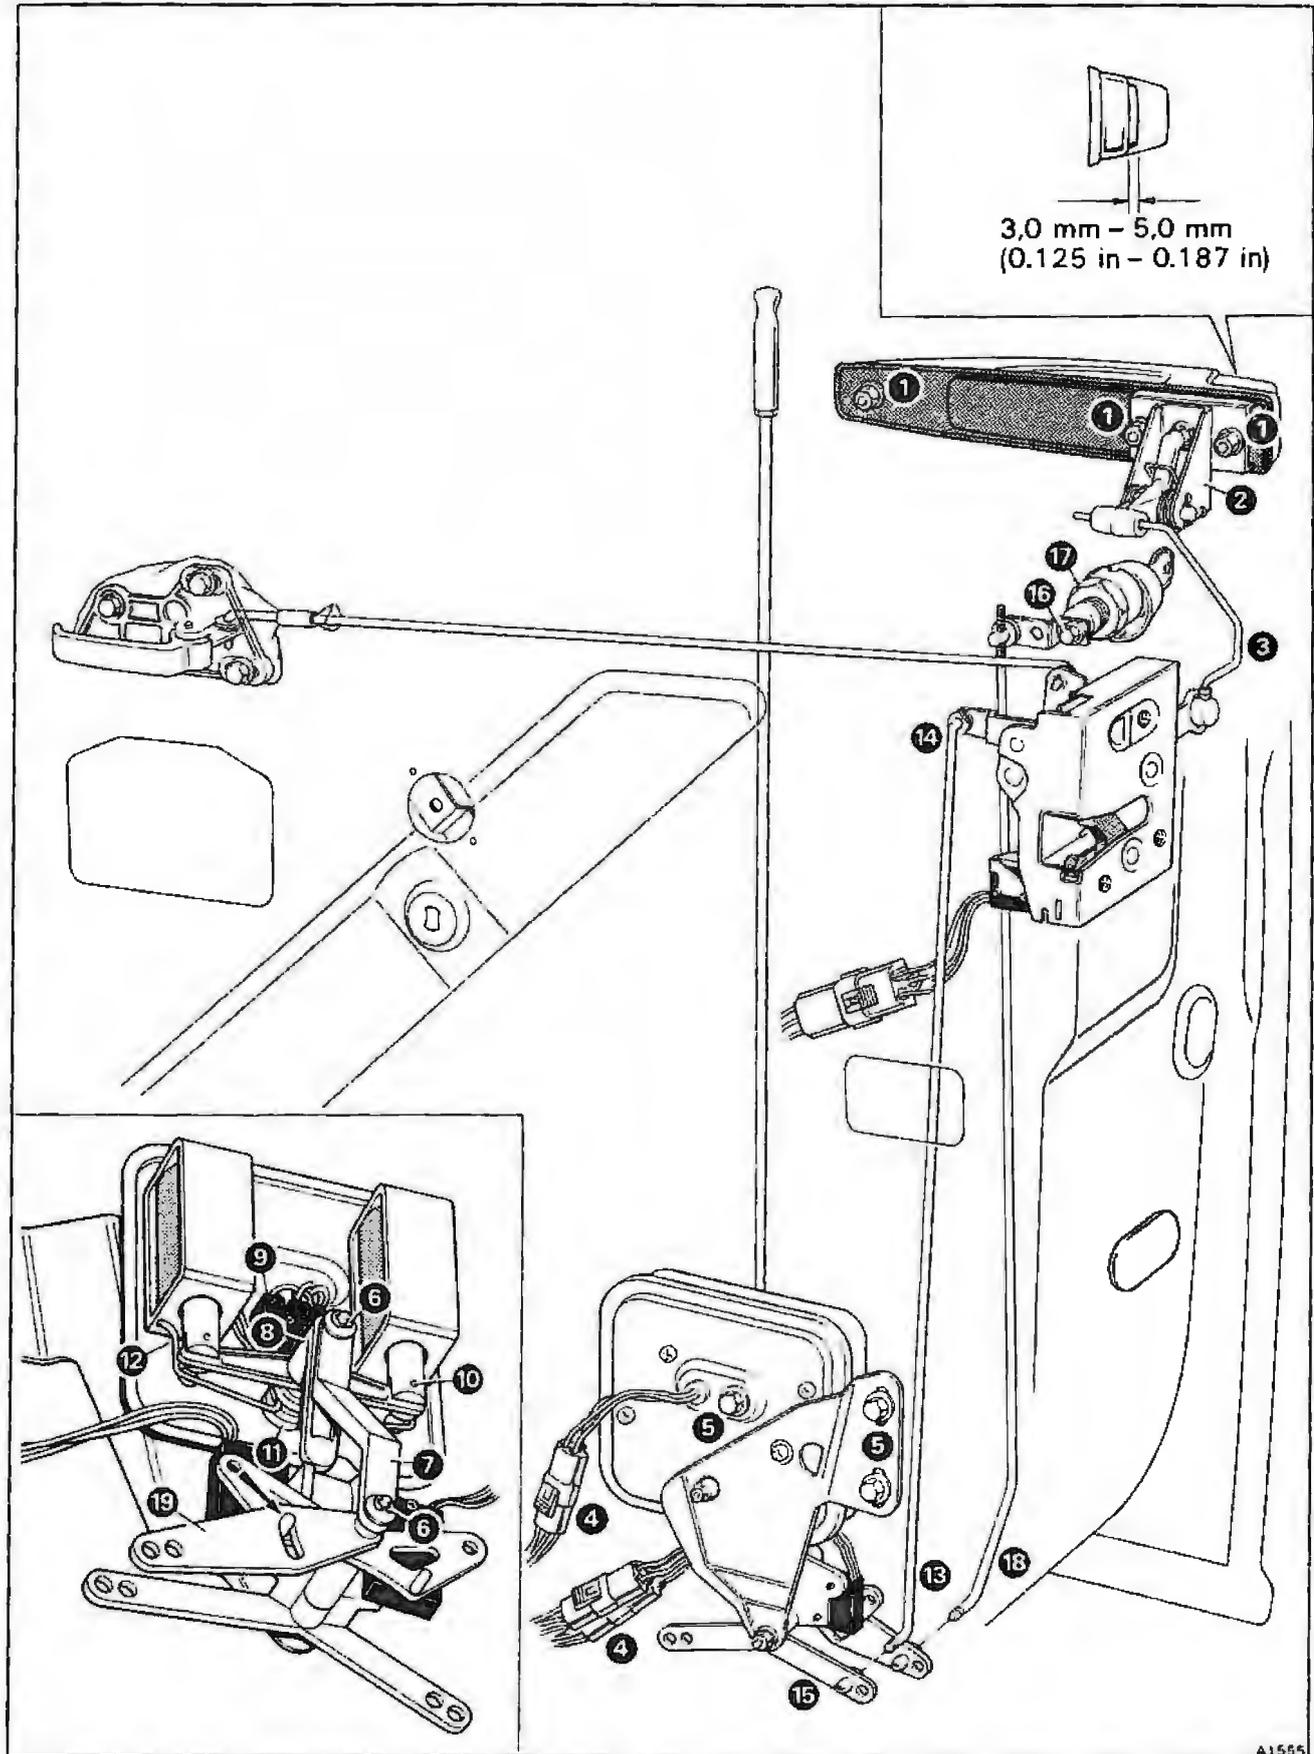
Exterior door handle, solenoid assembly, private lock unit, and fittings
